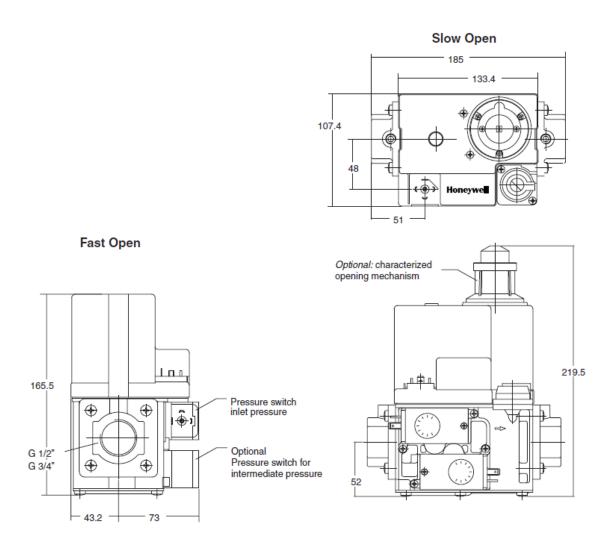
Dimensional drawing VR415/VR815 (DN15) and VR420/VR820 series (DN20)
